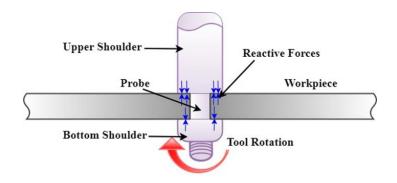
Schematic of self-reactive or bobbin tool FSW [14].
